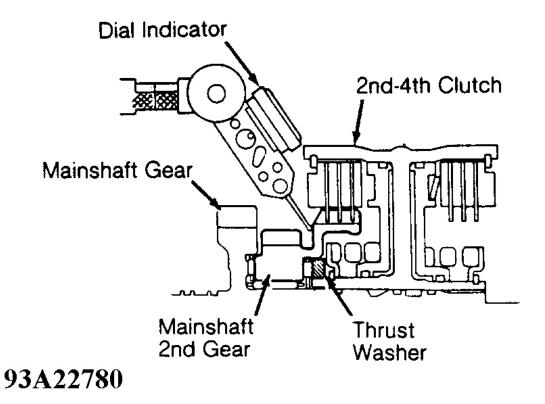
Checking Mainshaft 2nd Gear Clearance Courtesy of AMERICAN HONDA MOTOR CO., INC.
